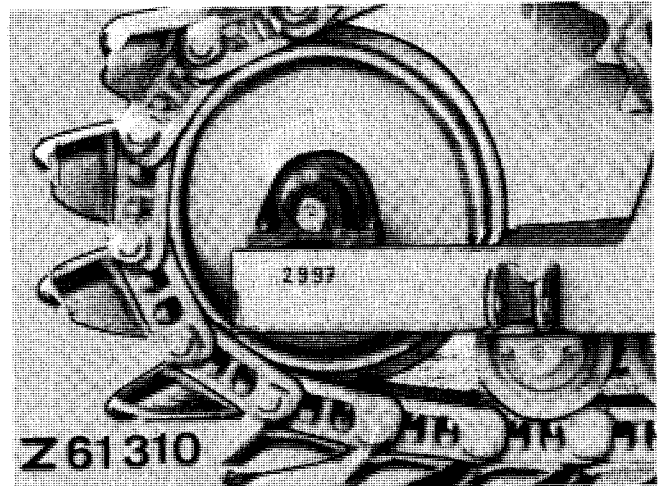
Serial Number of Track Assembly, L.H. Side
